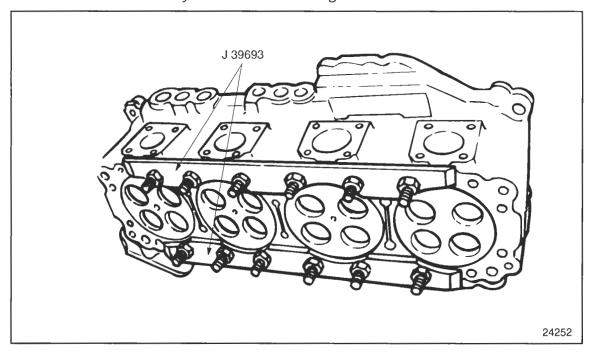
Cylinder Head Pressure Test Equipment Installation
